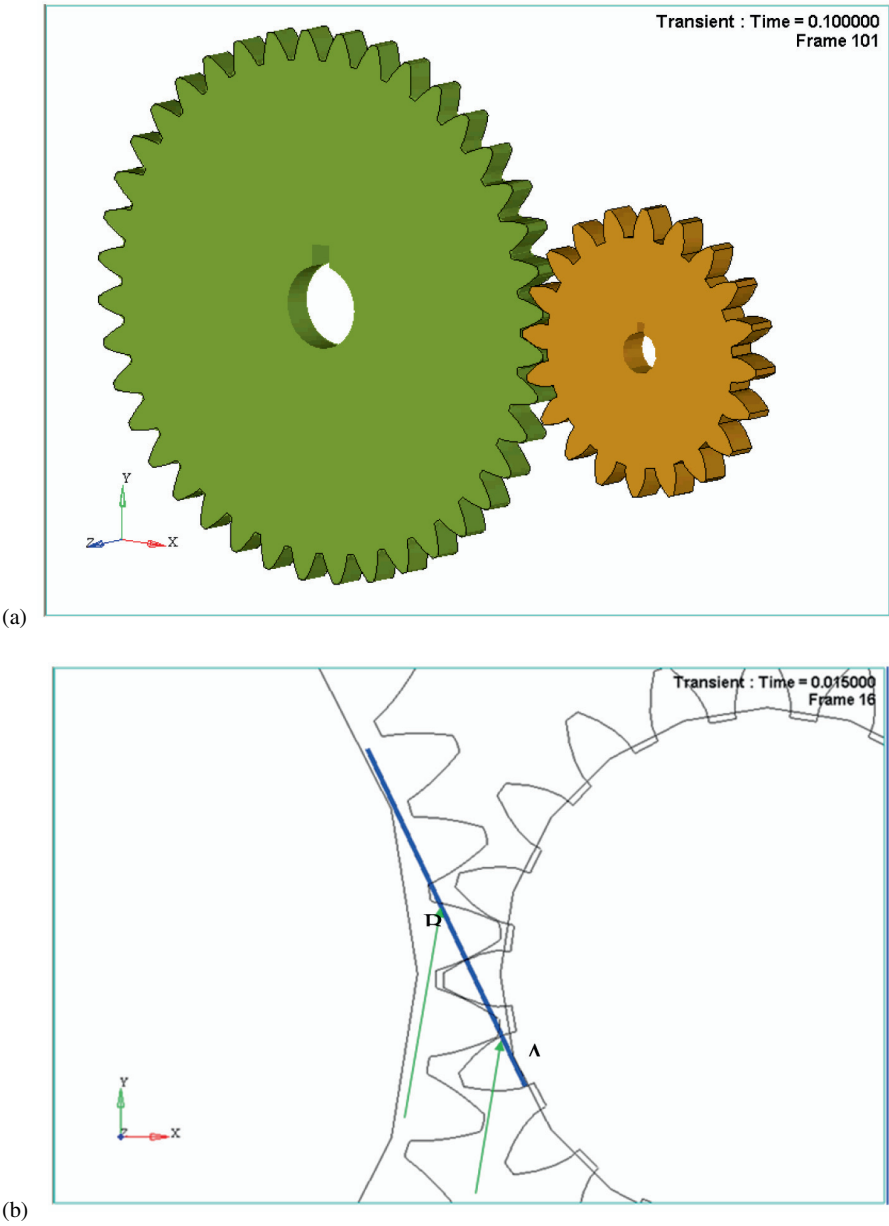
(a) Mating gears. (b) Close-up view of meshing teeth and line of contact
